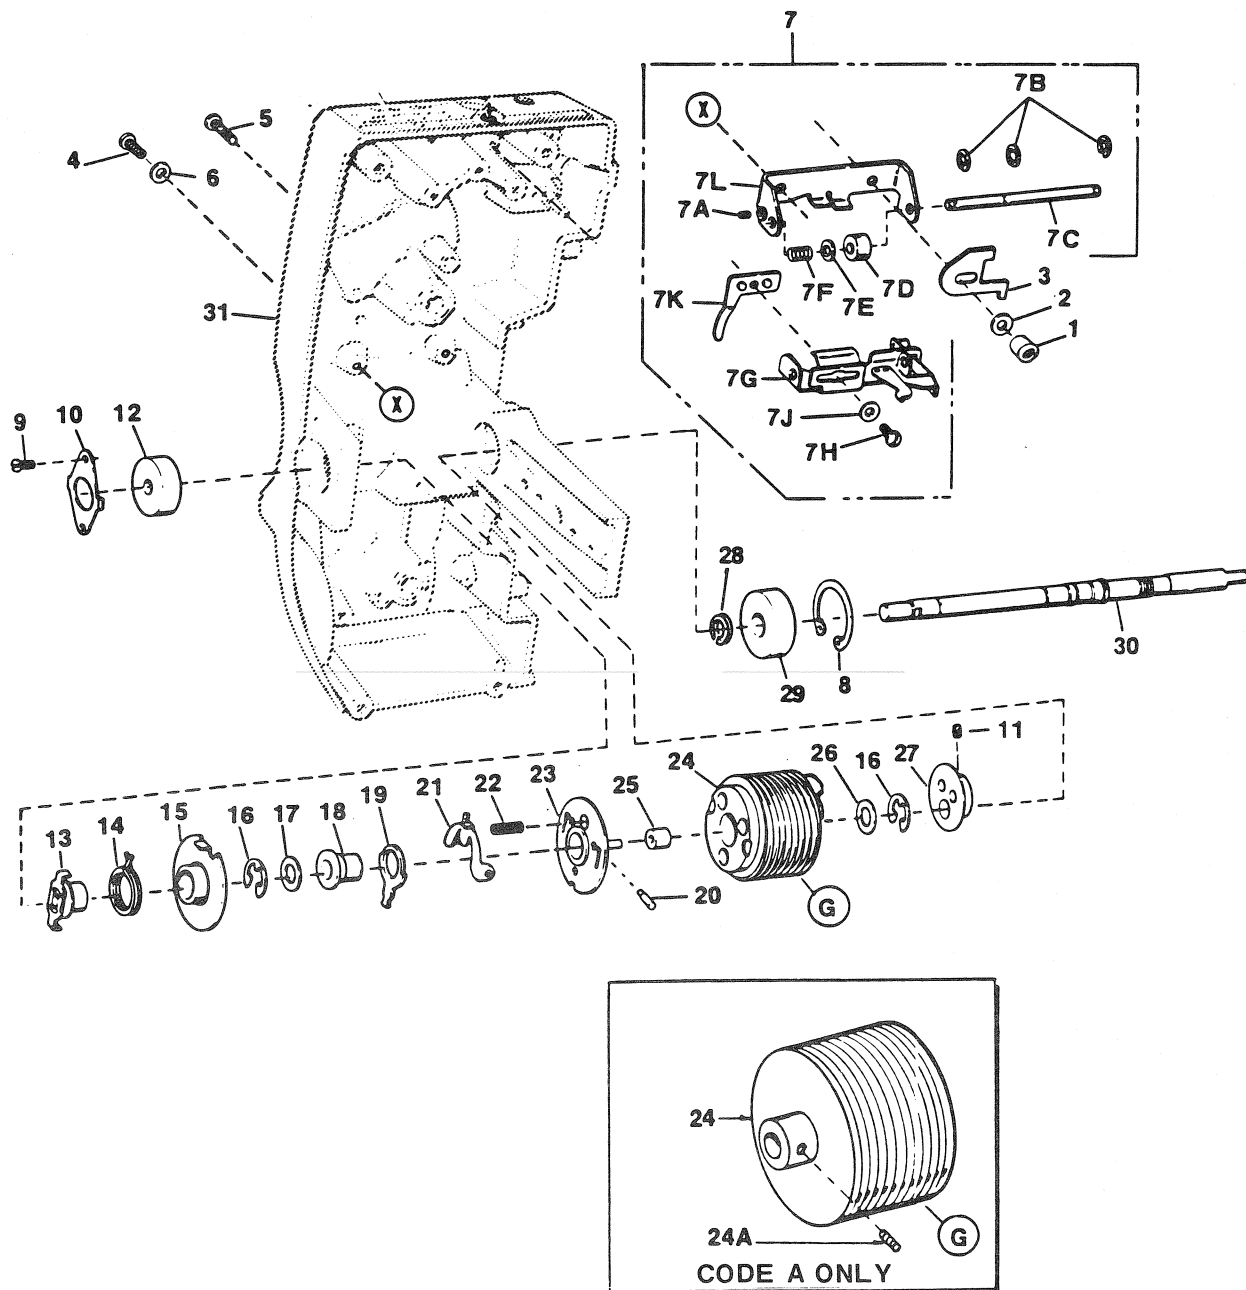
MECHANISM ASSEMBLY VIEW V
